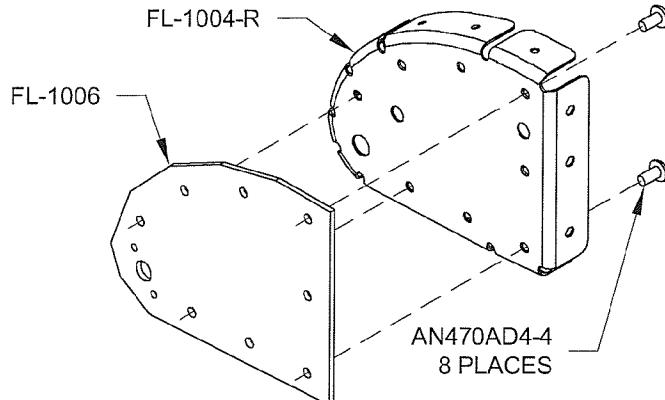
INBOARD ROD END RIB SUBASSEMBLY
